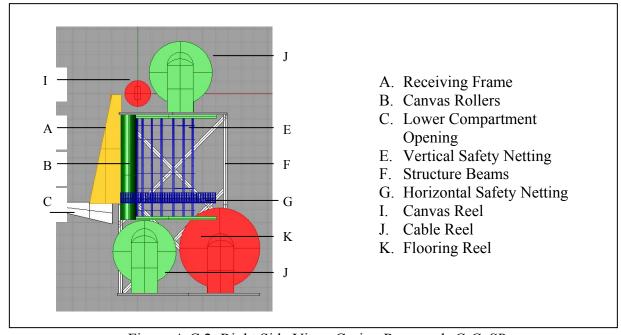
Right Side View, Casing Removed: C-CaSBr
